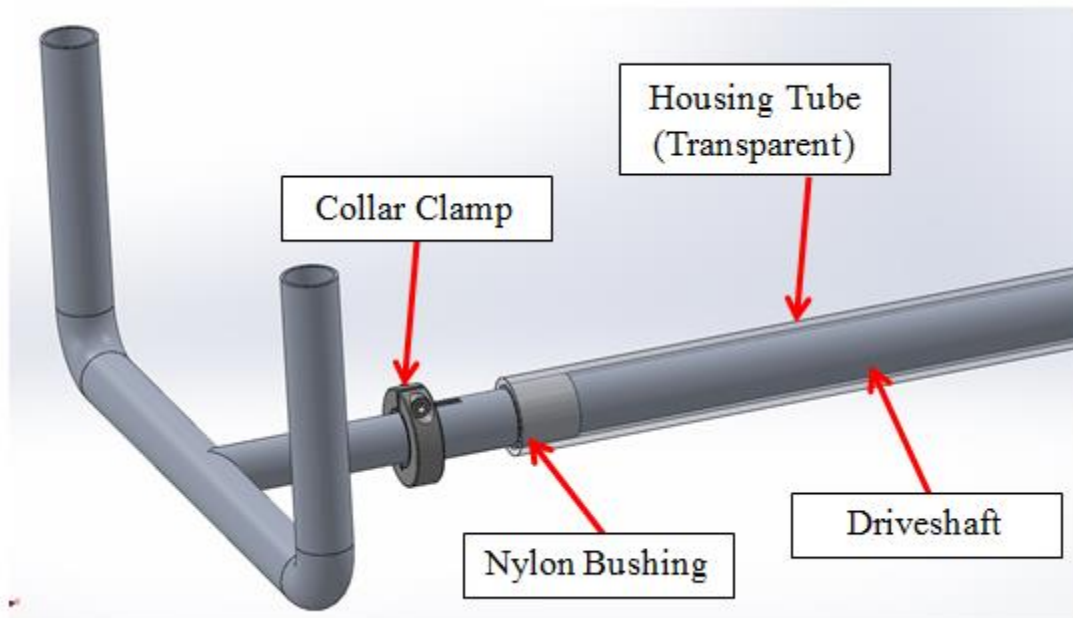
Steering Wheel and Collar Clamp. By loosening and tightening the collar clamp the steering wheel can be adjusted in and out based on the riders preferred position.
